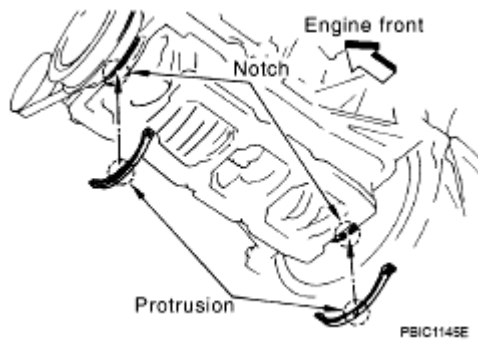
Aligning Protrusion Of Oil Pan Gasket With Notches Of Front Timing Chain Case And Rear Oil Seal Retainer
